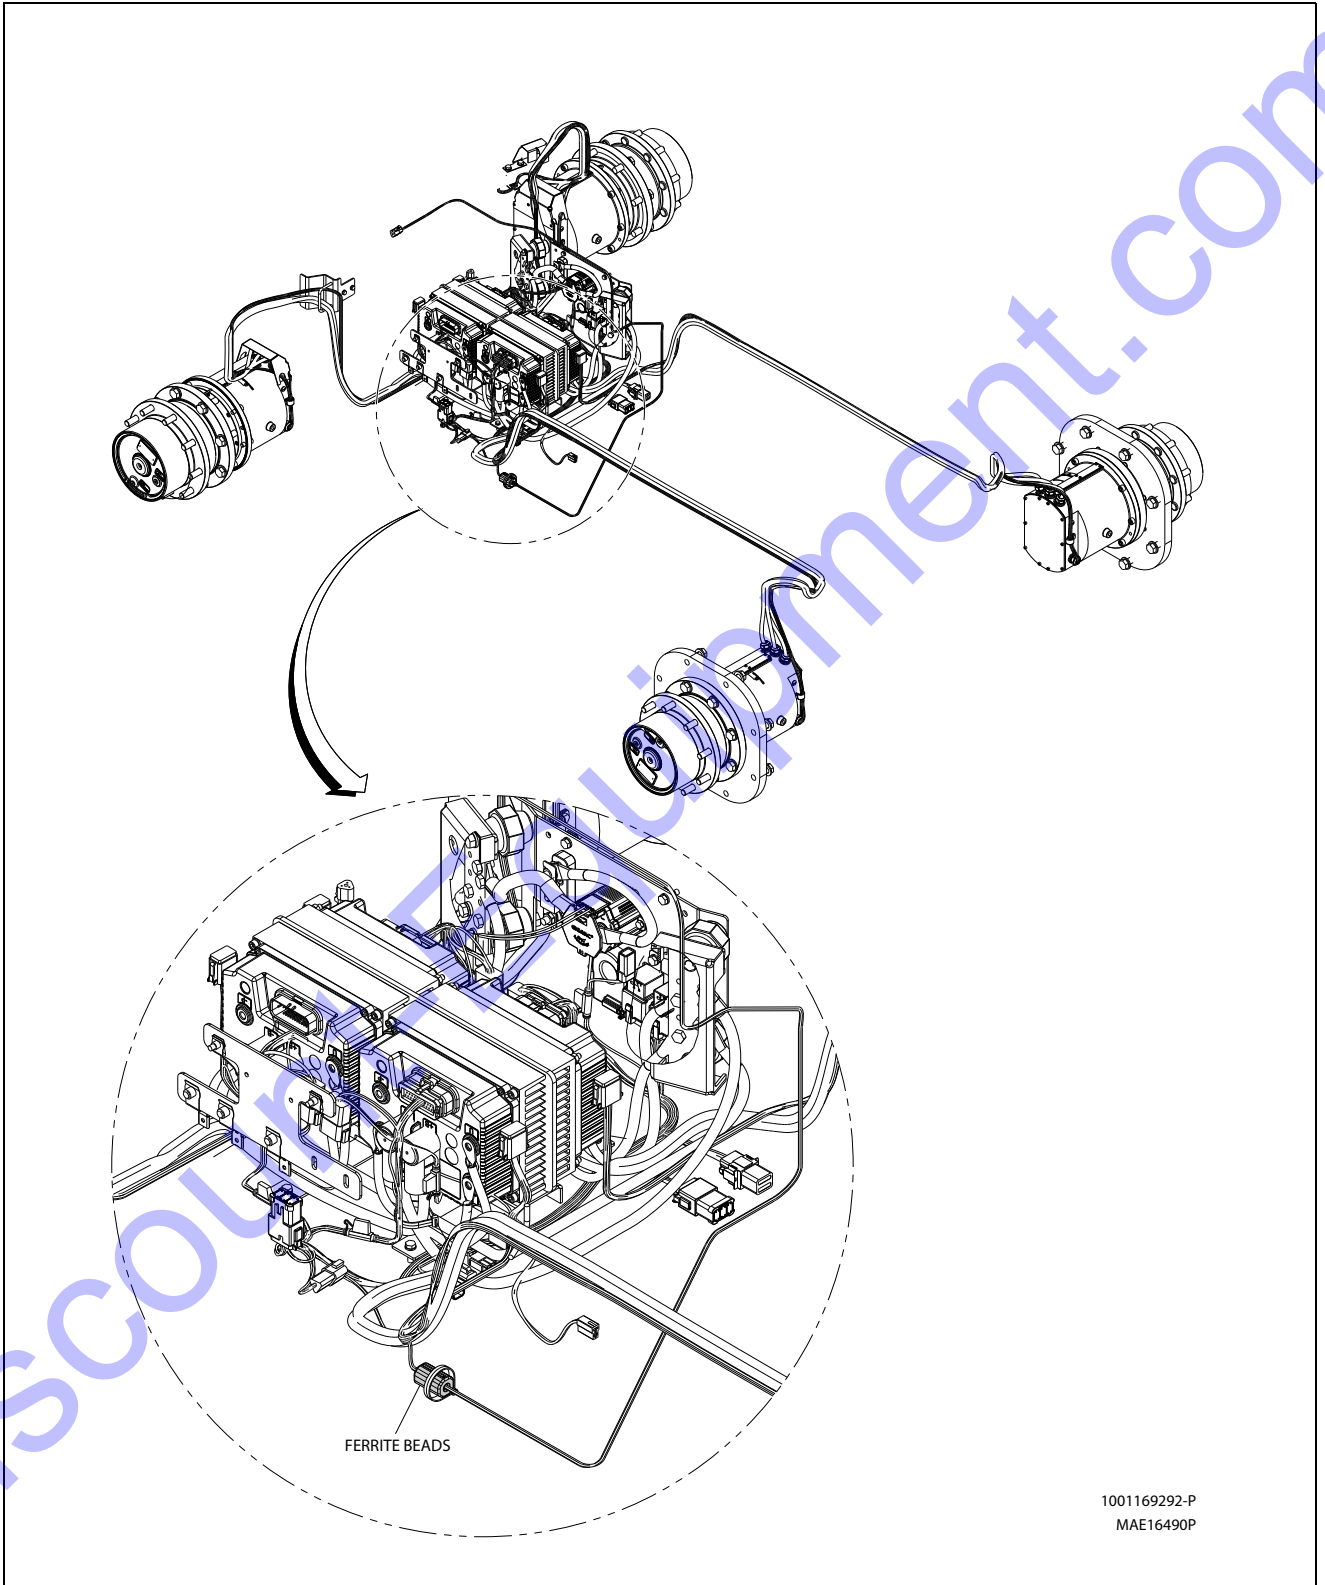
Ferrite Beads - Drive Cables (SN 0300236472 to Present)
